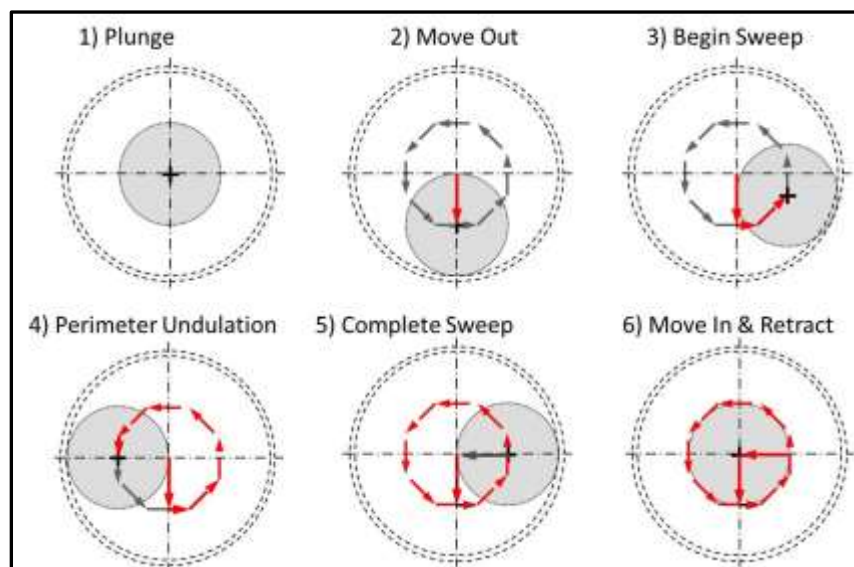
Travel path of probe during FSSW process producing OctaSpot™ weld.
